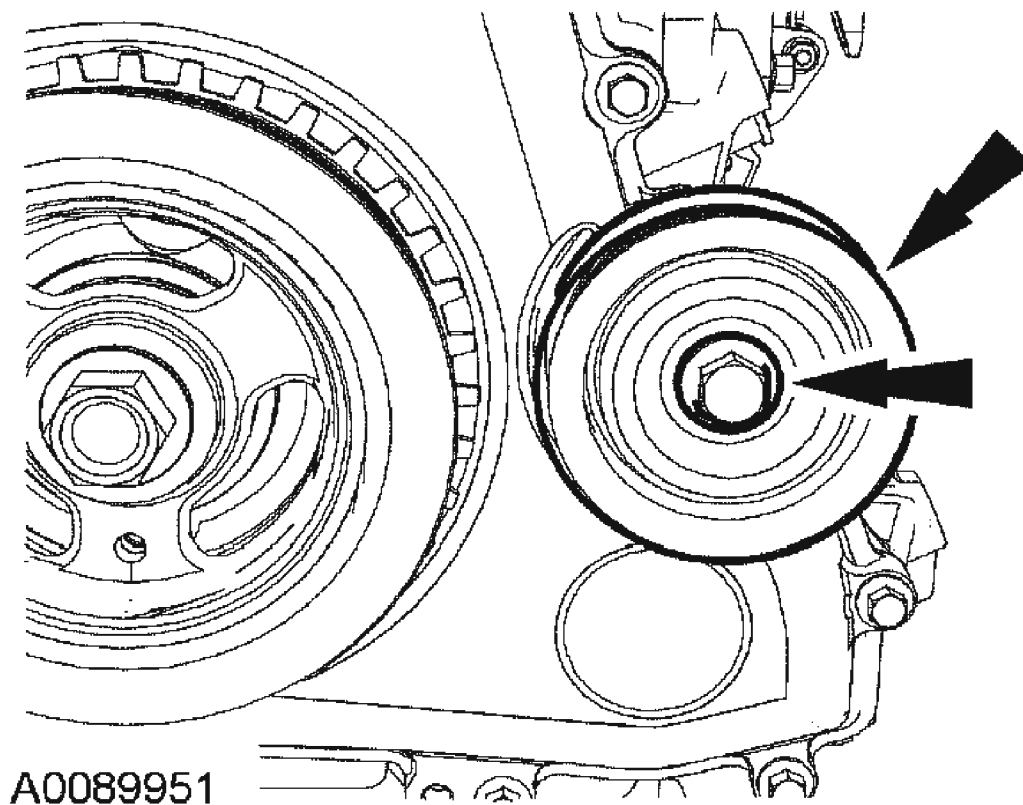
Loosening Bolt And Removing Accessory Drive Belt Idler Pulley
